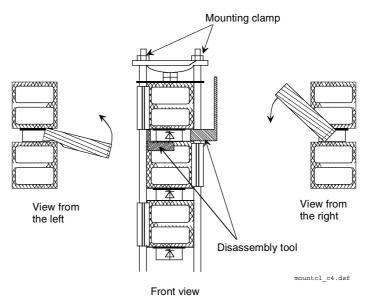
How to use the disassembly tool (at a left thyristor stack of a converter)
